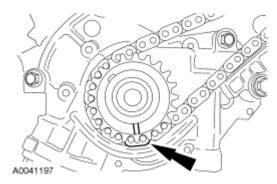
Aligning Copper (Marked) Link With Timing Mark On Crankshaft Sprocket Courtesy of FORD MOTOR CO.
